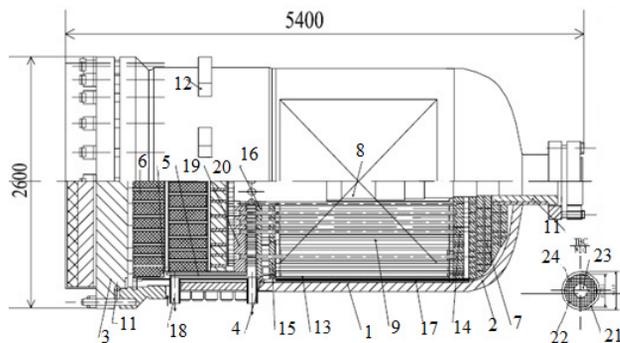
Design of high temperature gas-cooled reactor. 1-vessel; 2 – bottom; 3 – closure head; 4 – core shroud; 5 – fuel assemblies holder; 6 – upper shield; 7 – edge shields; 8 – target; 9 – core; 10 – nozzle of ion guide; 11 – sealing; 12 – reactor vessel fixing elements; 13 – core shroud shell; 14, 15, 16 – core plates; 17 – shield; 18 – output gas nozzle; 19, 20 – fuel assemblies holder shell, plate; 21, 22, 23 – fuel assemblies' tubes; 24 – cylindrical fuel elements.
